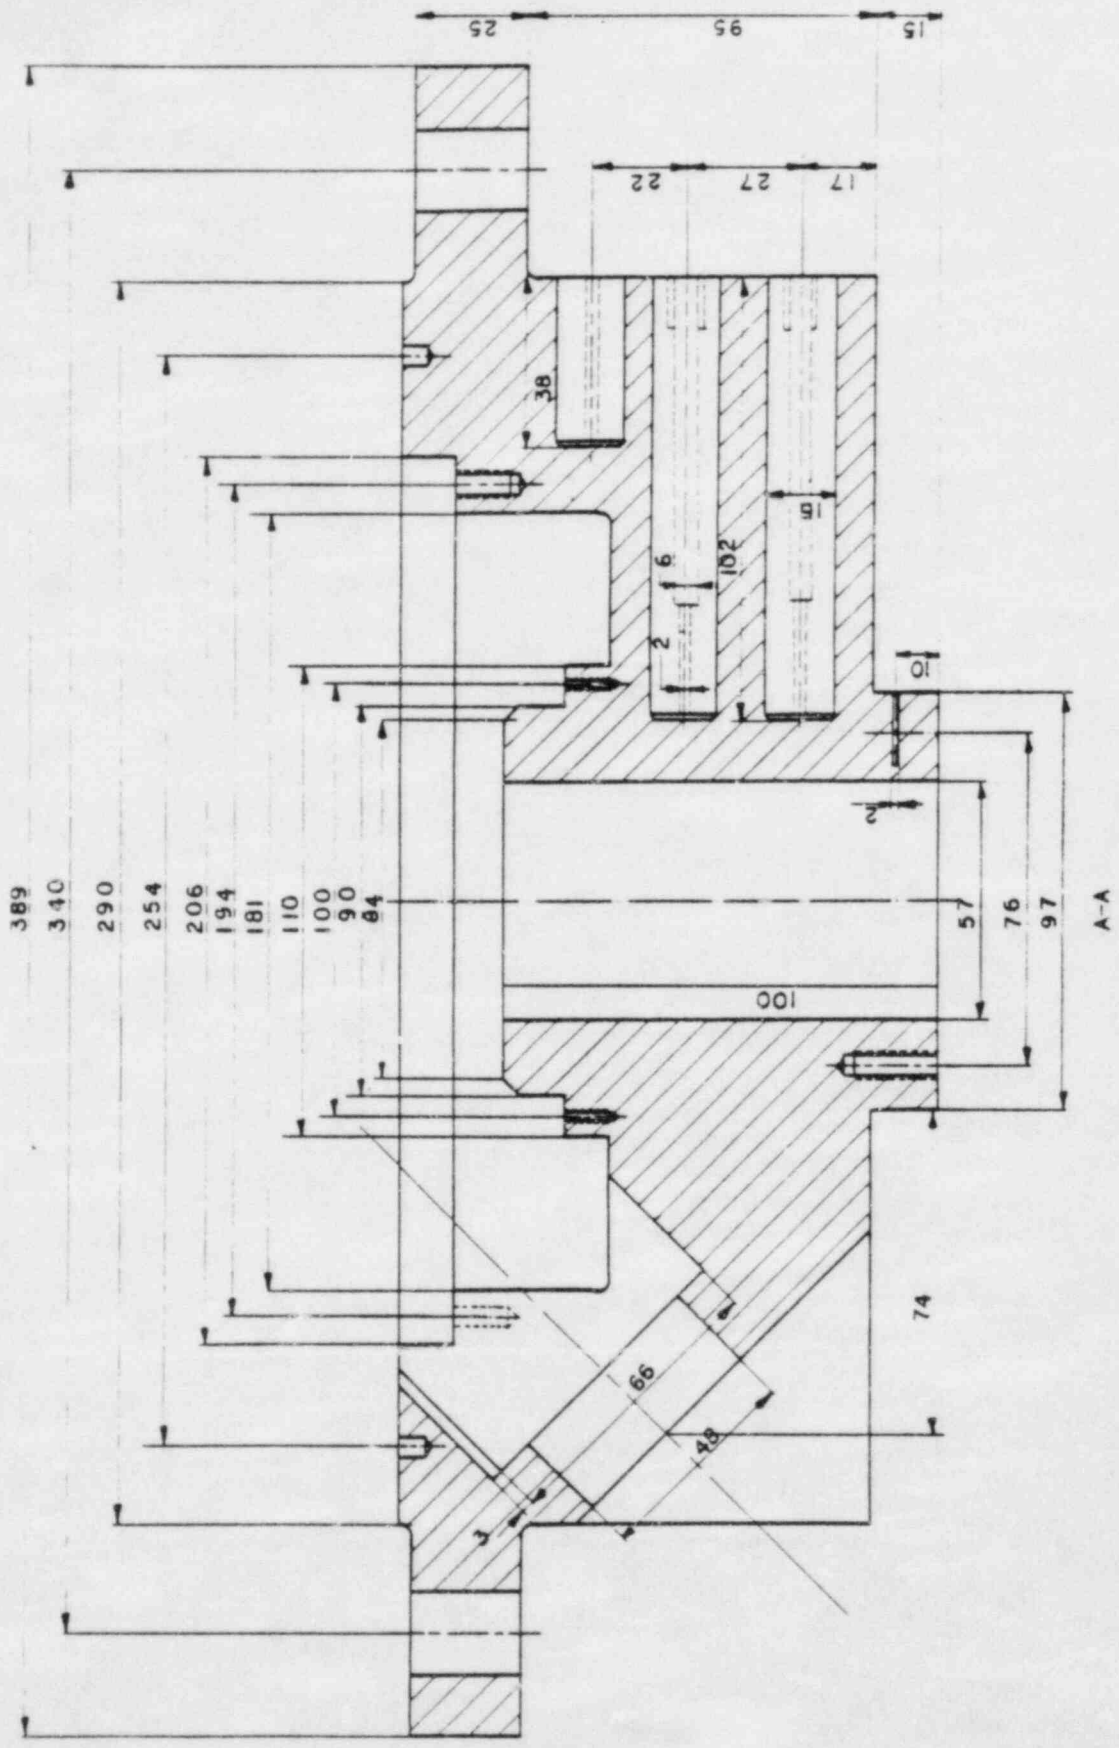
Lower Piece of the Top Patch (Vertical View)
